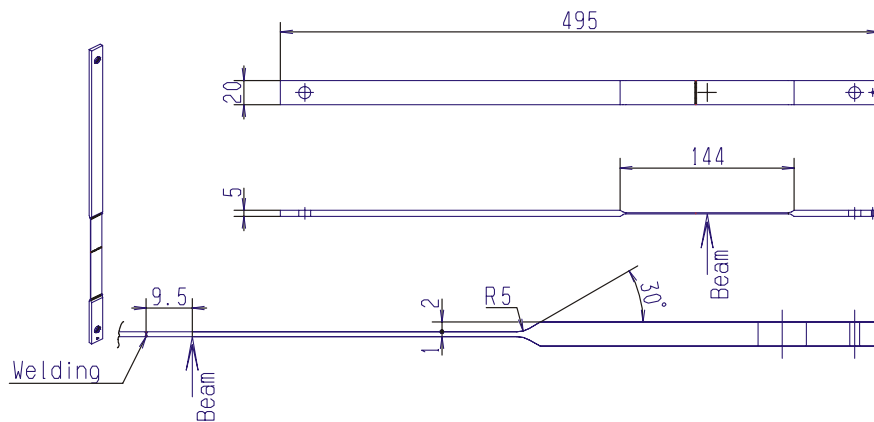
Nominal dimensions of the welded specimen irradiated in test section nos. 2, 3 and 4.
